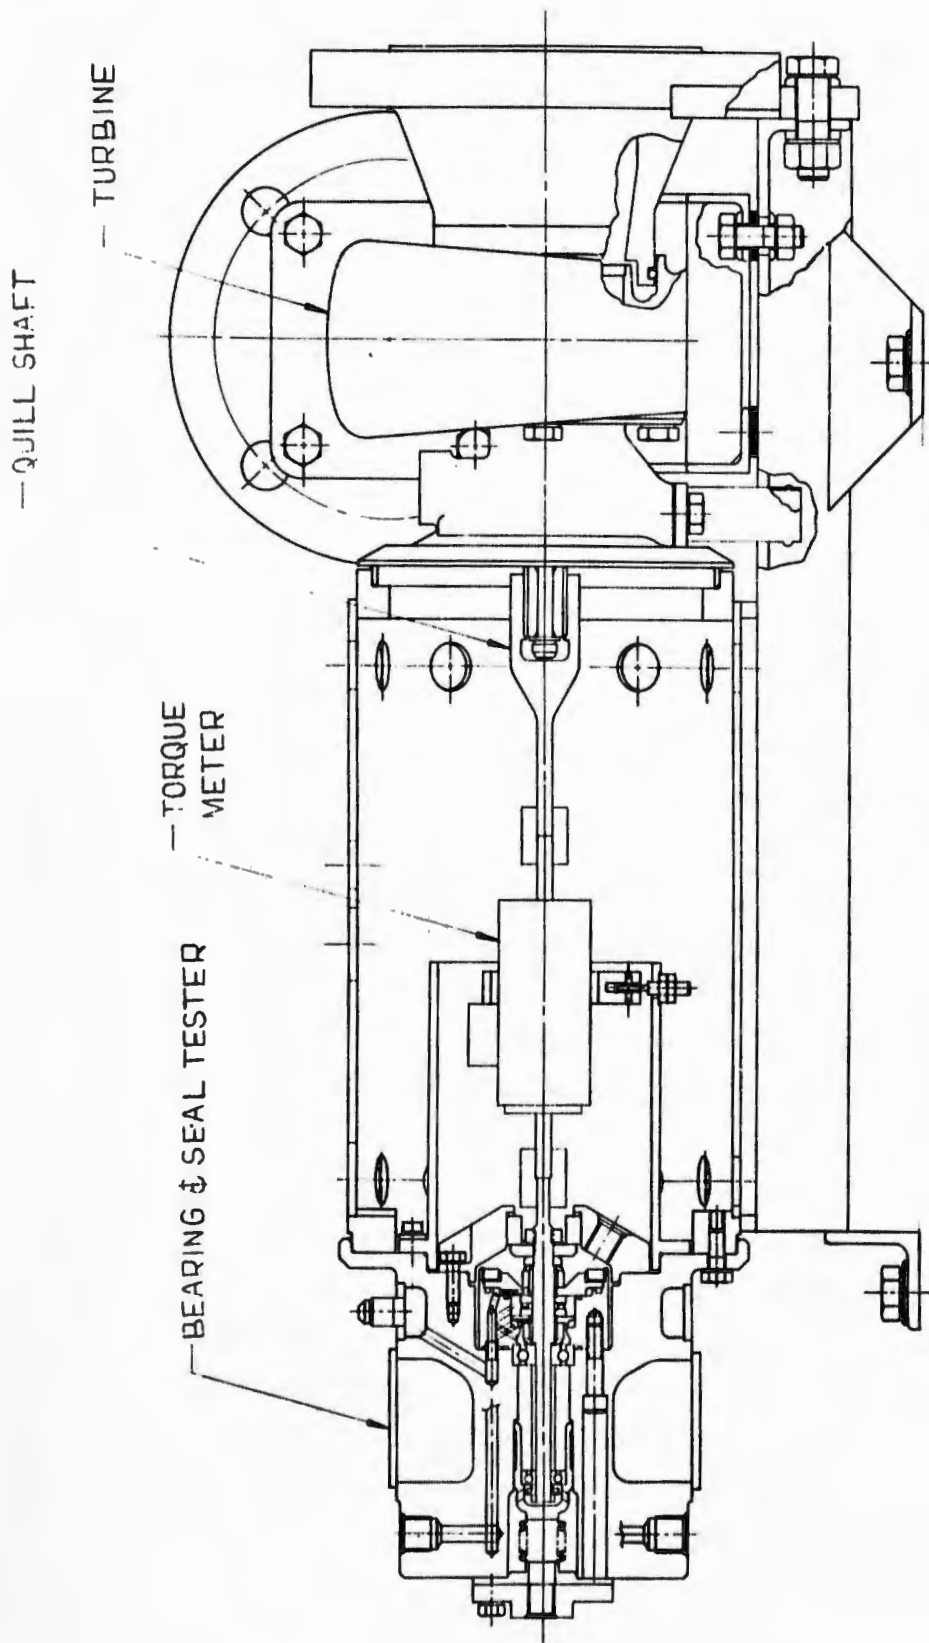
Secondary Engine Oxidizer Turbopump Bearing and Seal Tester and Drive Assembly (U)
